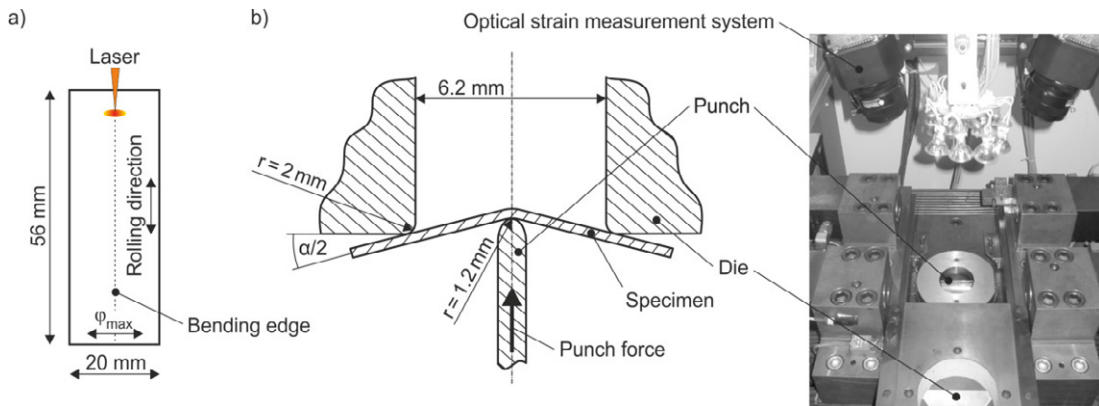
(a) scheme of bending specimen; (b) bending test setup
